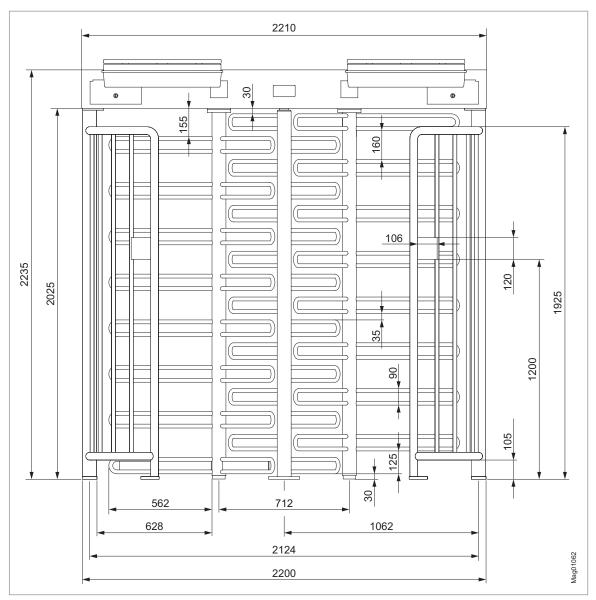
Dimensions MPT-333 – view from below (dimensions in mm), illumination optional
